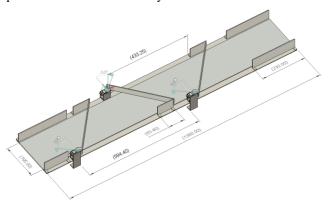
Isometric CAD drawing of sorting conveyor detailing dimension and angle constraints of servo motors.
